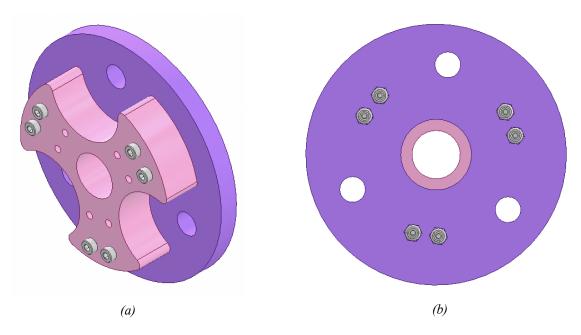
Carrier (light purple) and output (pink) subassembly including the M3 bolts and locknuts connecting them. (a) Isometric view of the assembly. (b)Back view of the assembly showing six locknuts fitted inside the hexagonal cutouts in the carrier.
